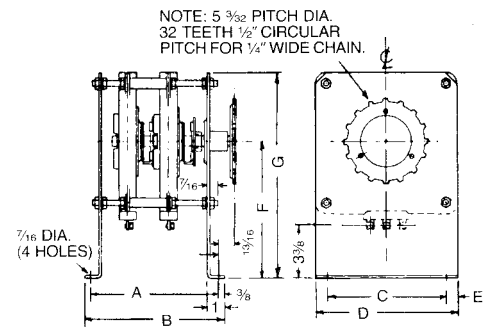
Dimensions of plate rheostat mounted with Catalog 9736330G1 floor support and sprocket wheel (7-in. handwheel is furnished for hand operation)
